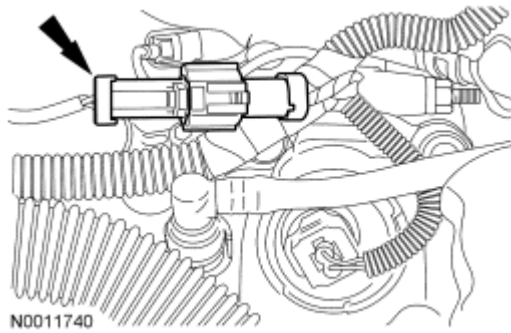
Locating Generator Jumper Harness Electrical Connector
